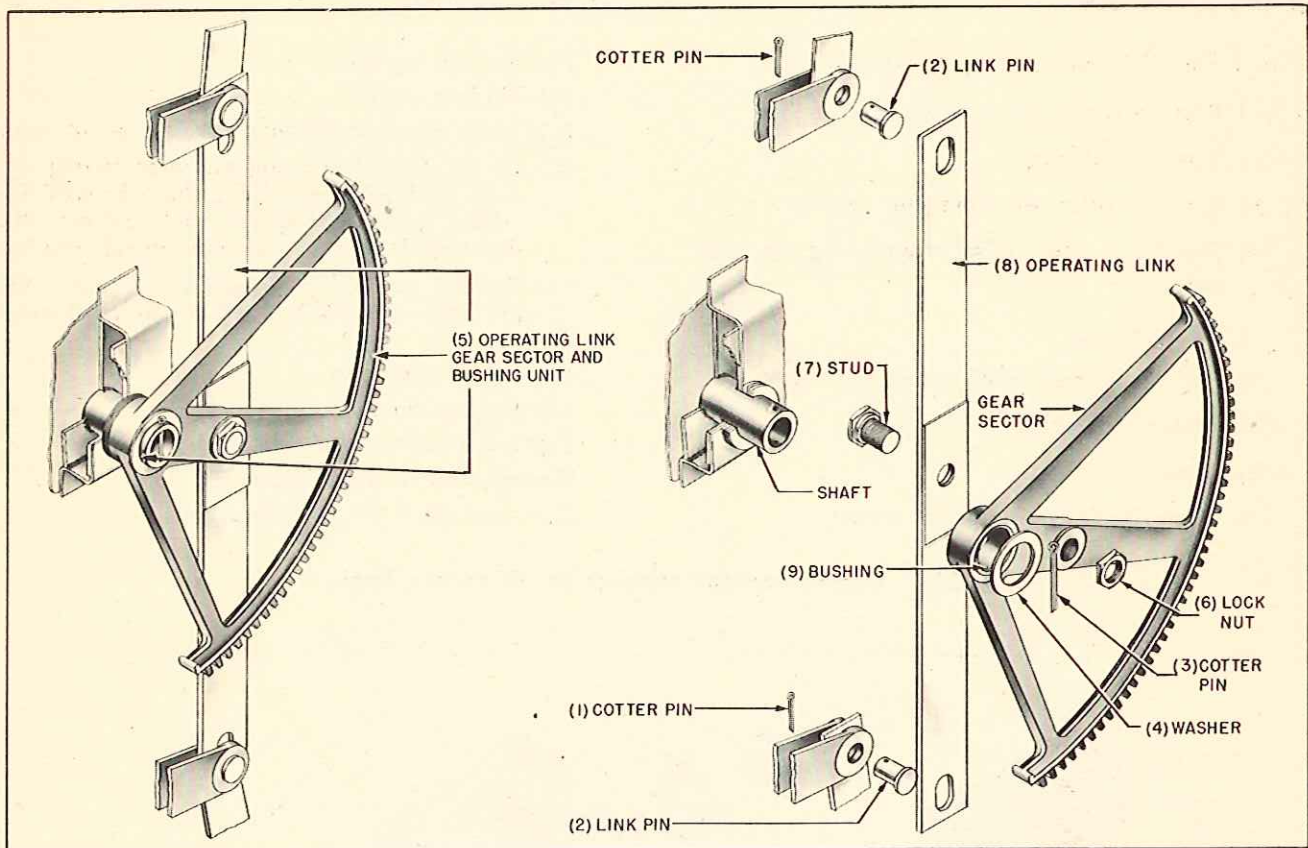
Gear sector (quadrant), assembly and exploded views, TLD-2(crs) doors.
